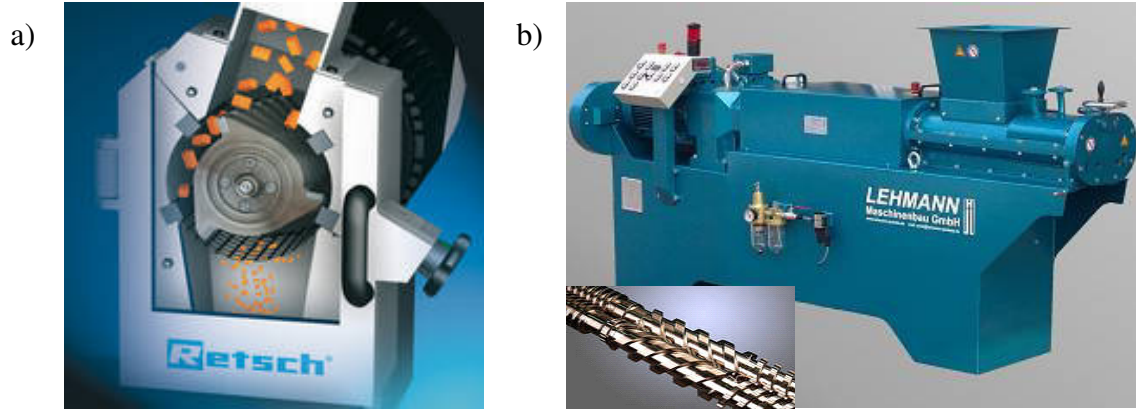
a) Impact mill / hammer mill (HM) and b) Twin-screw extruder (EX).
